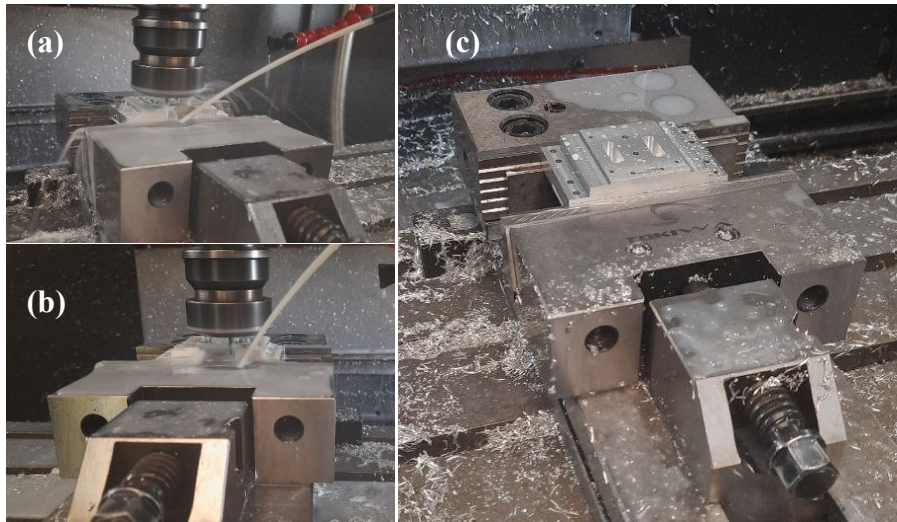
Other face radial car middle during machining process: (a) and (b) machining one side of the part and (c) end of machining for one side
